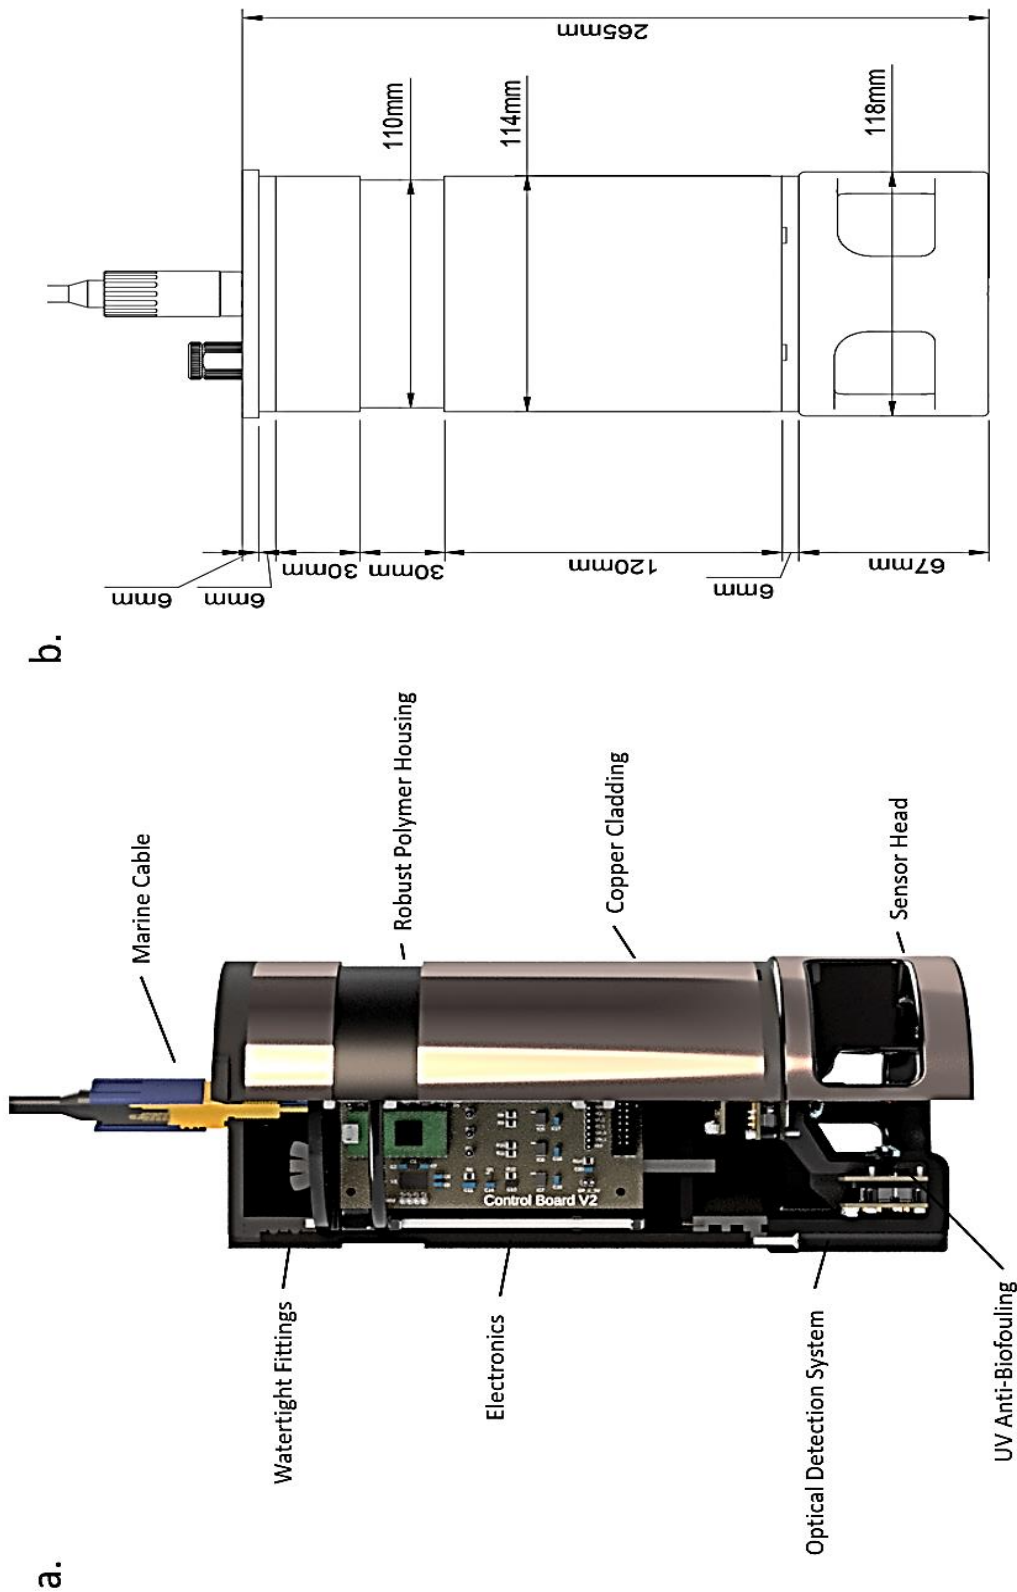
Overview design of the optical sensor unit prototype. (a) Labelled CAD Render with quarter-slice view of the sensor unit design. (b) Dimensioned drawing of the sensor unit design.
